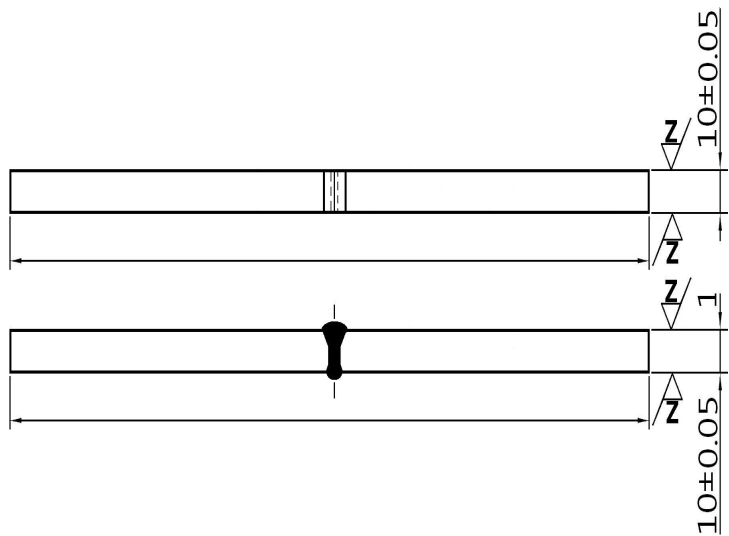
Geometry of hardness and welding structures in specimens
